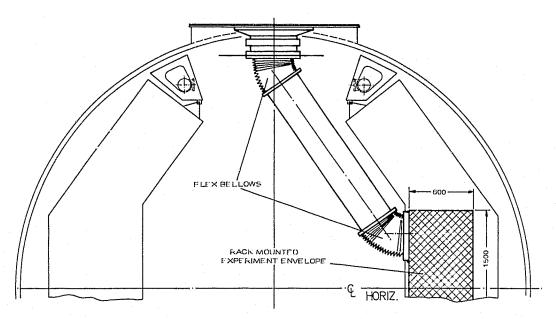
Flack Mounted High Vacuum Equipment
